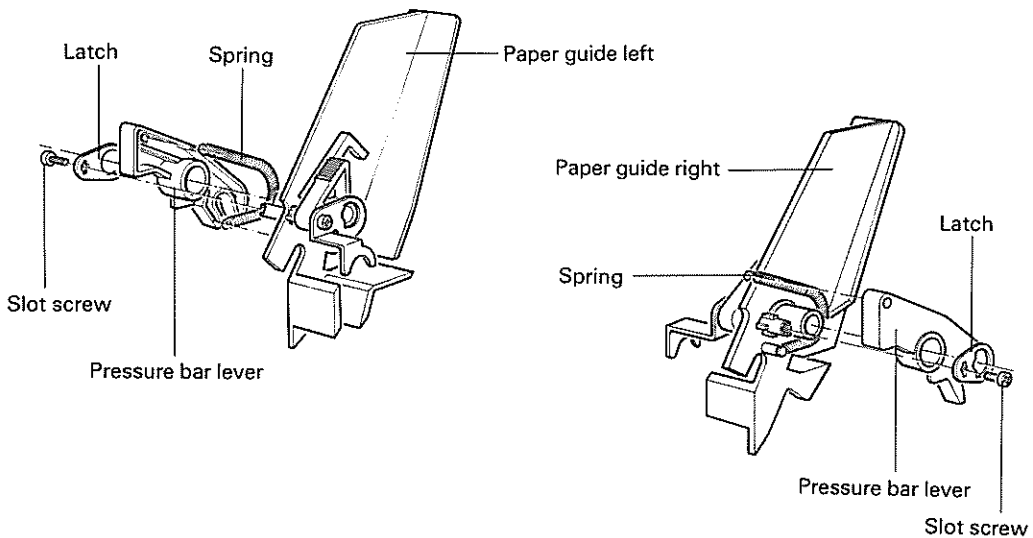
Pressure Bar Lever and Tension Spring Removal
